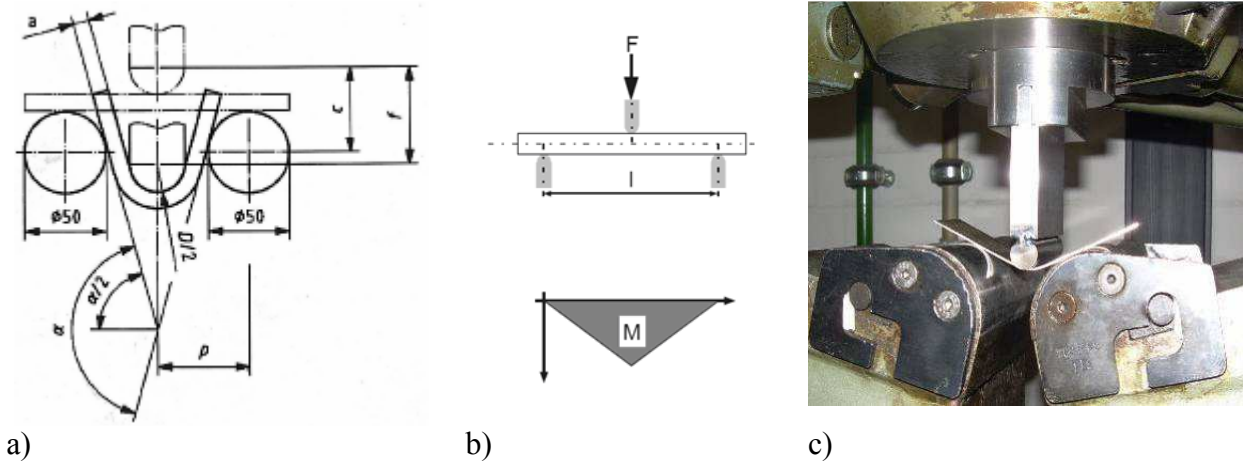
The dimensions of three-point bending (a), moments M by three-point bending (b), and photo of equipment (c)
